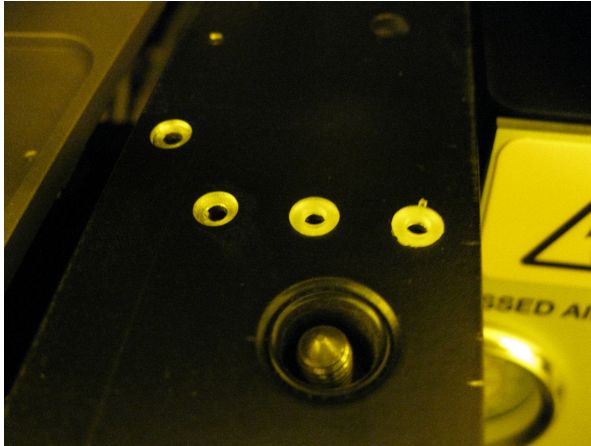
Close-up of o-rings after removal of load frame. The two leftmost o-rings are missing.
